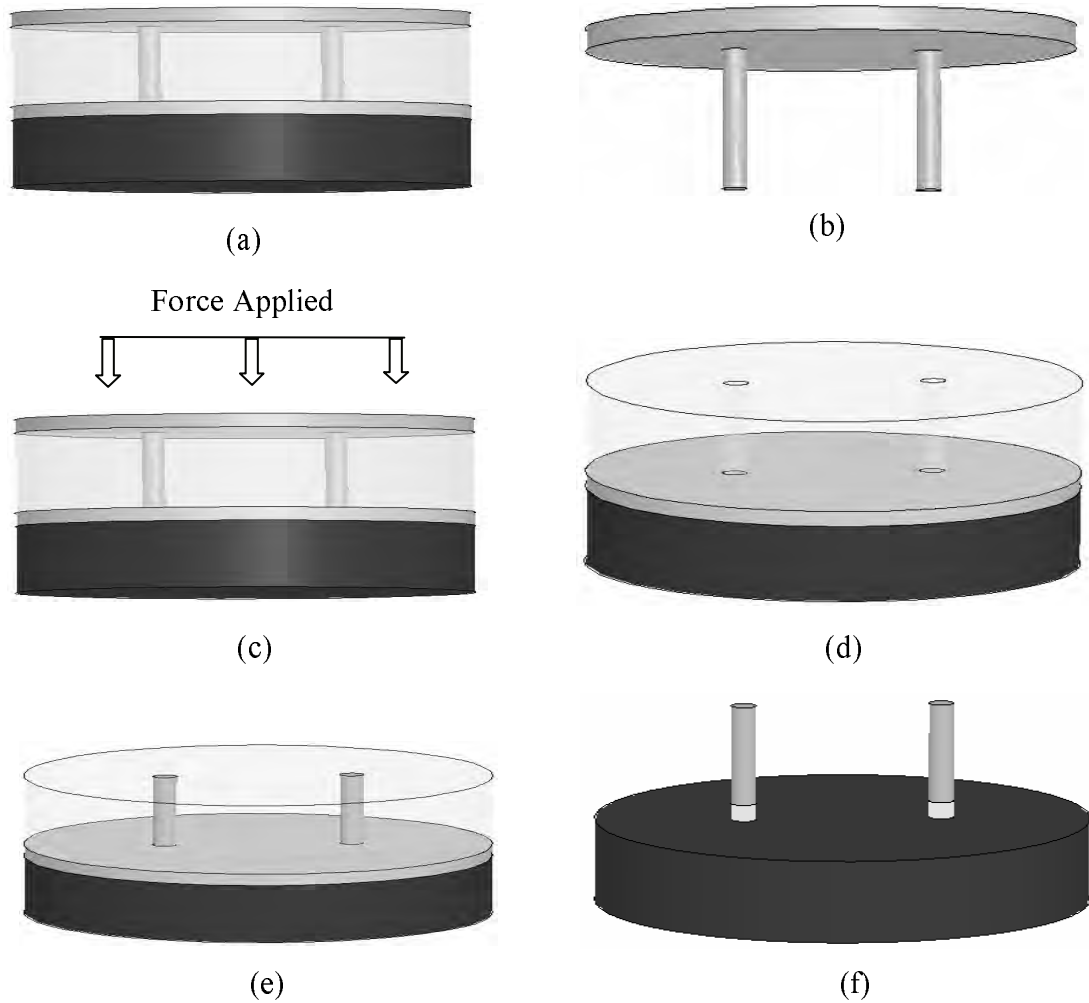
LIGA Process with Replication by Hot Embossing: a) Metal overplating into X-ray patterned photoresist; b) Release of metal mold insert; c) Hot embossing; d) Plastic mold; e) Secondary metal deposition; f) Final metal structure
